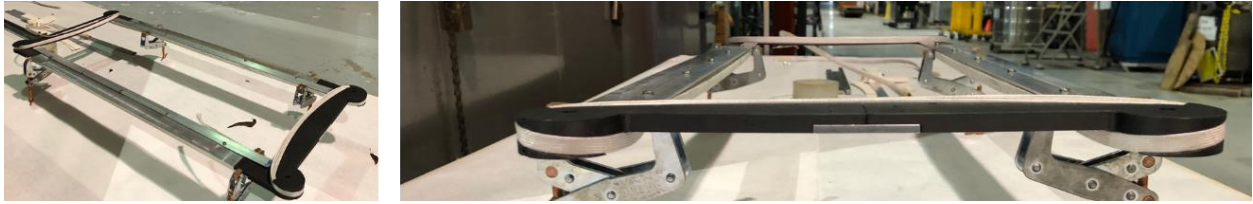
shows the winding of the Phase I overpass/underpass practice coil with the Rutherford cable. It is similar to the  $Nb_3Sn$  Rutherford cable that will be used in winding the actual coil in Phase II. The two pictures on the left and right side are views of the same coil turned over to show the other side.
